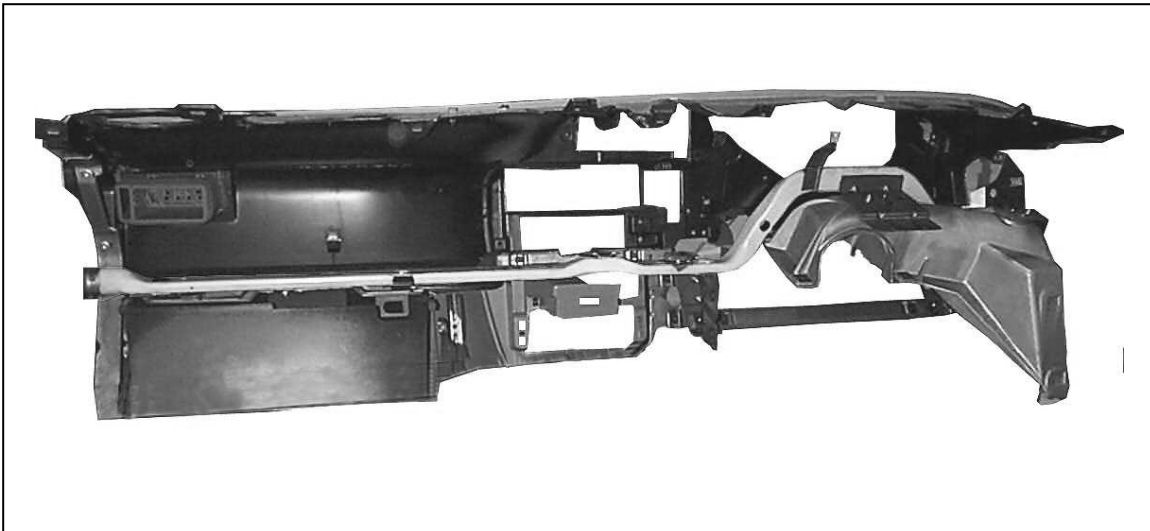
DaimlerChrysler Mini-van Instrument Panel Beam
